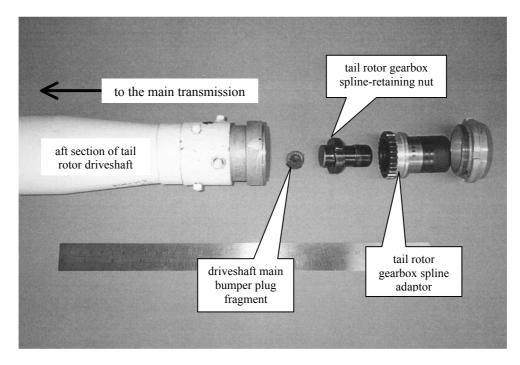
Components from the aft end of the tail rotor driveshaft and gearbox
